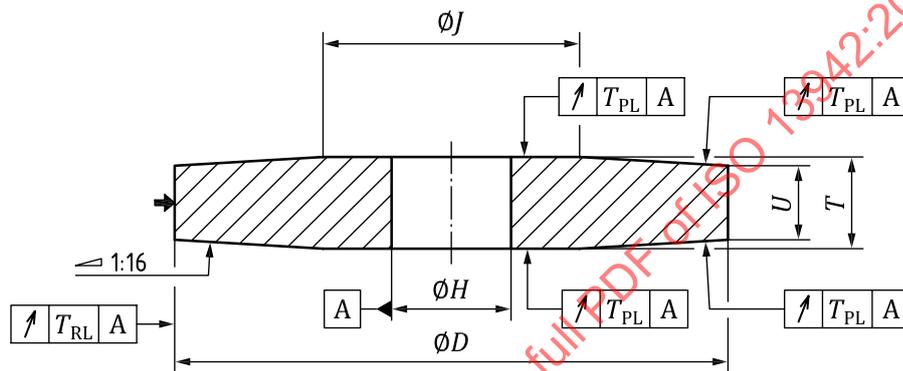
Grinding wheel, tapered on both sides (Type 4)
